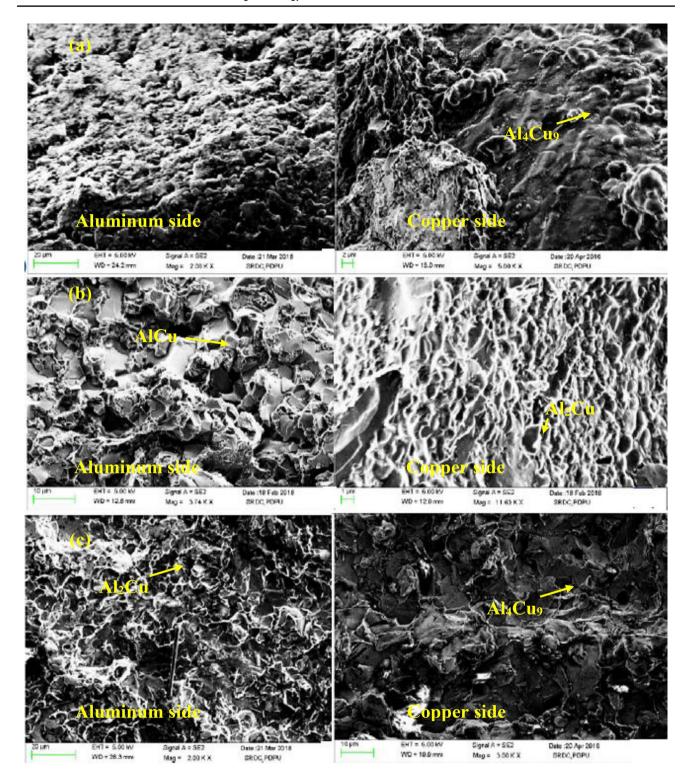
Fracture location of the samples in both aluminum and copper sides: a N1000-t5, b N1500-t15, c N2000-t15
